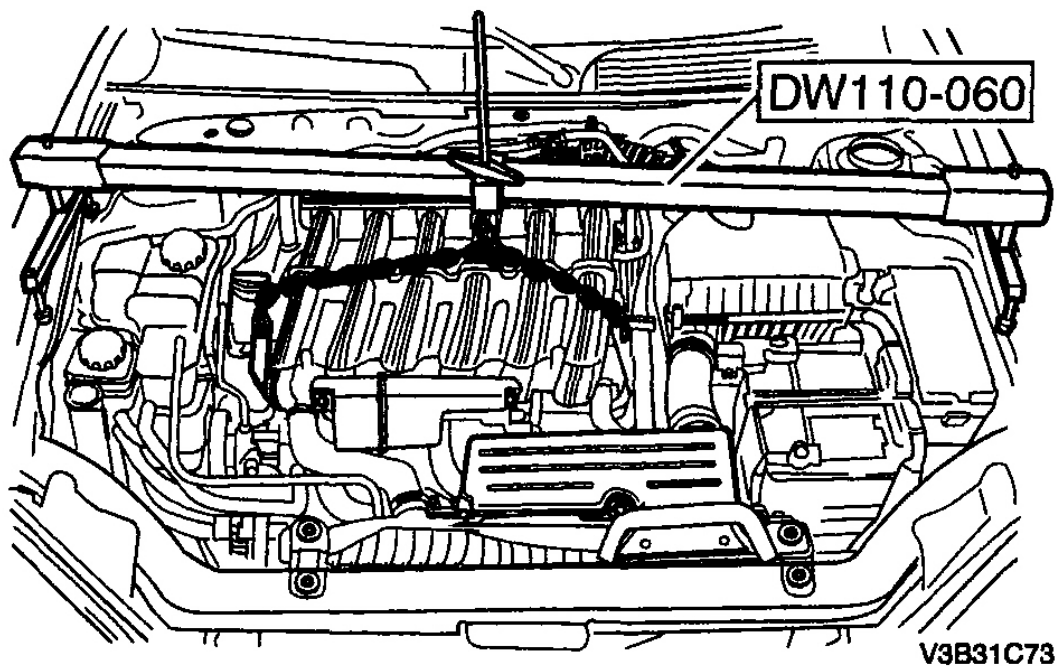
Supporting Engine Assembly Using Engine Assembly Lift Support DW110-060
